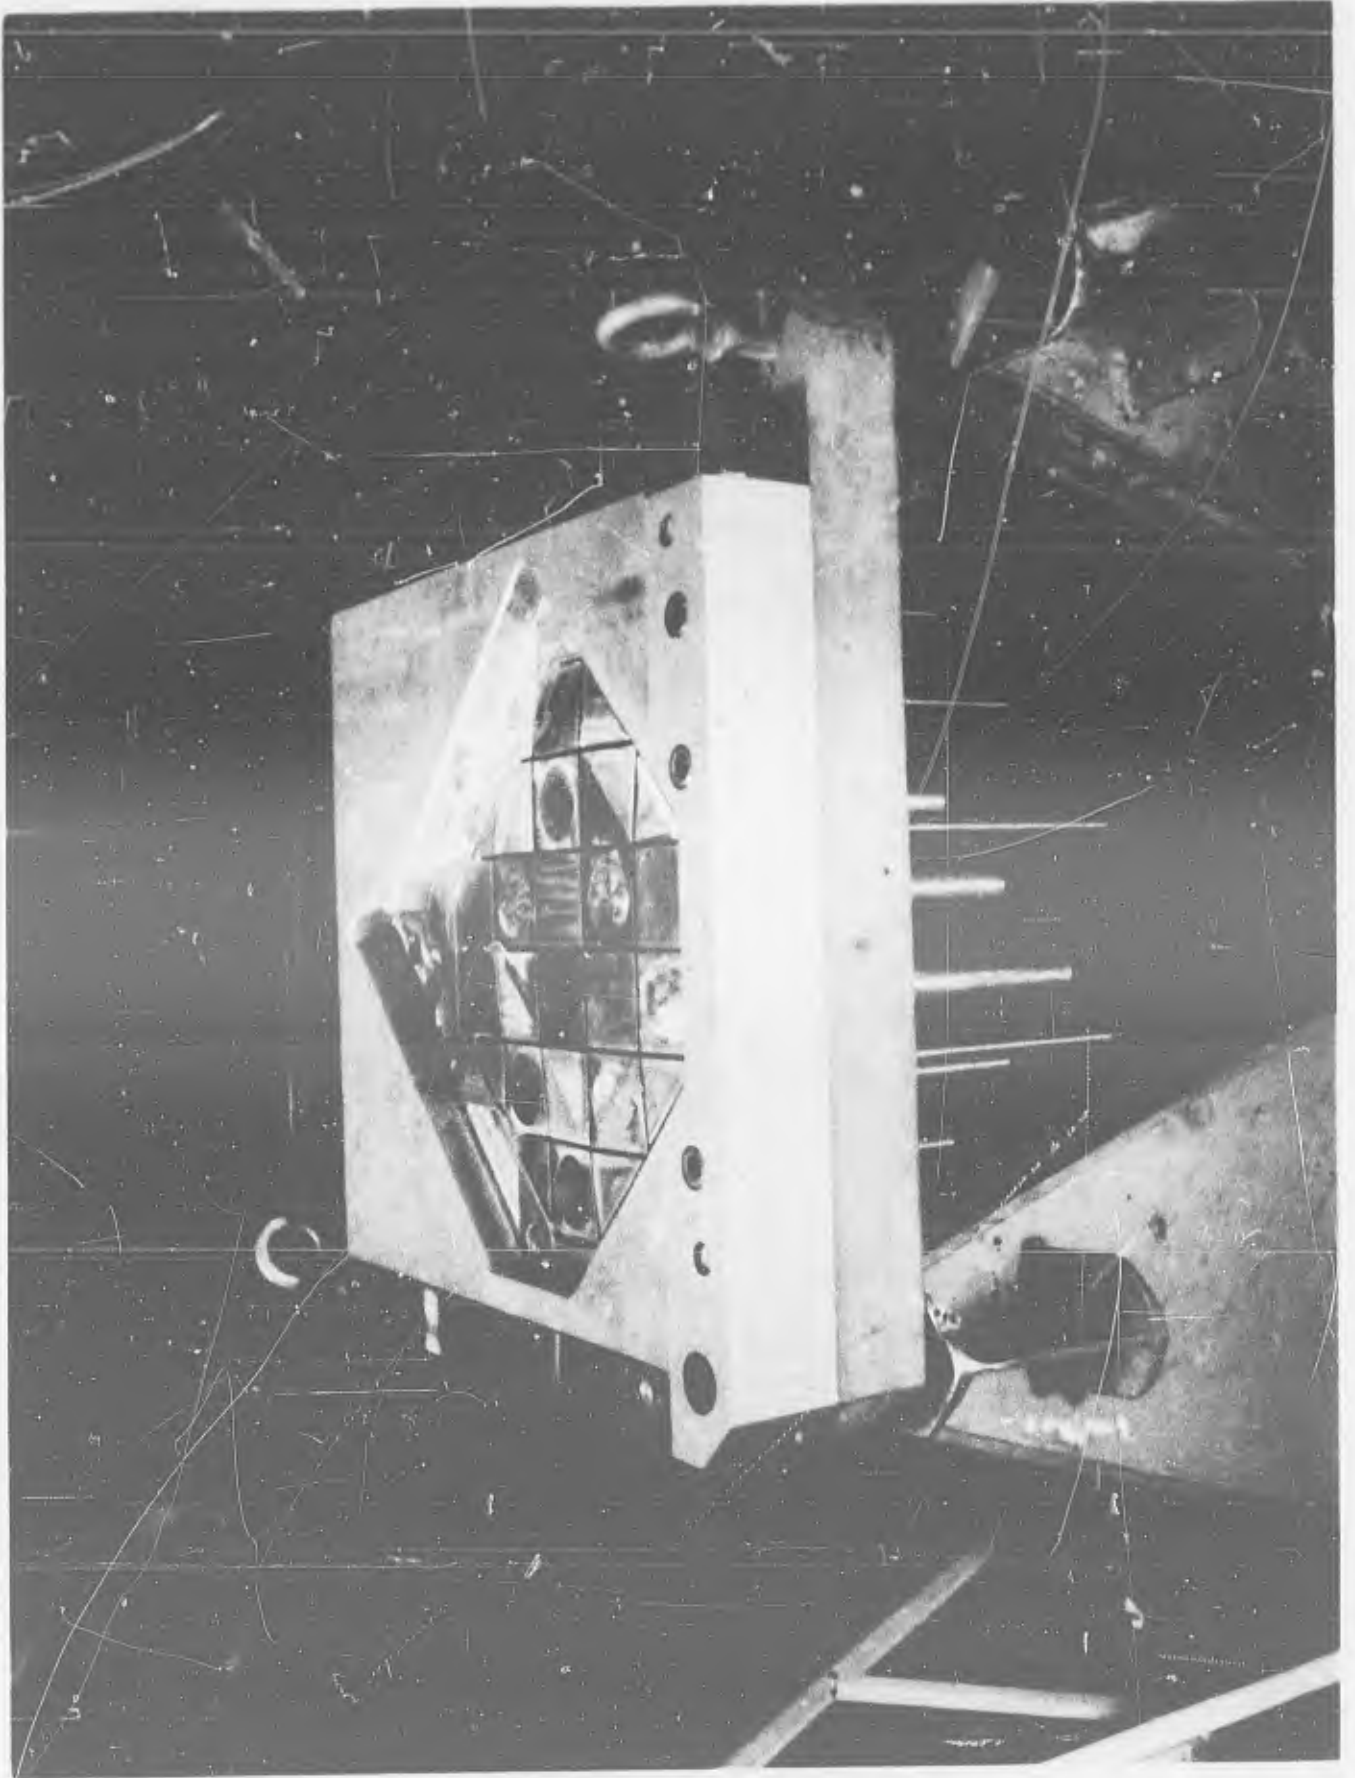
Die Insert Assembly Showing Arrangement of Knockout Fins.
